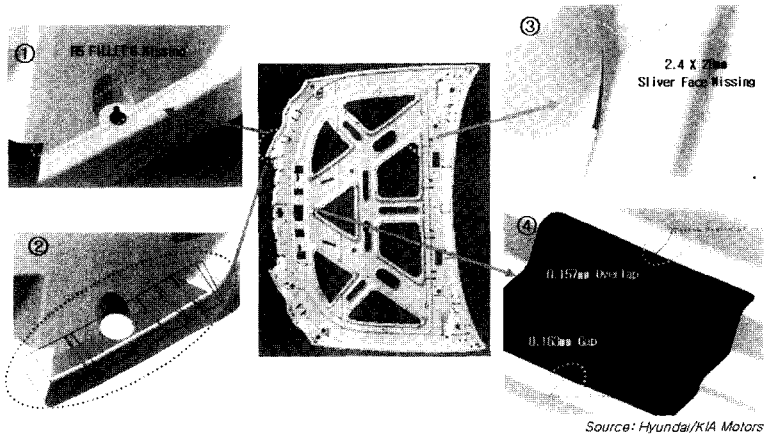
Examples of the 3D CAD model errors in the press die manufacturing
